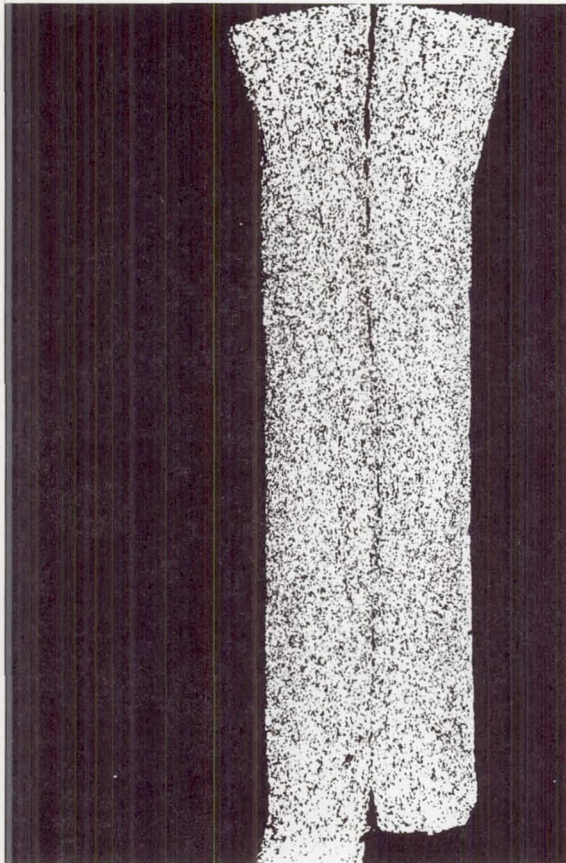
Higher Magnification Photo of Weld Shown in Figure 13
